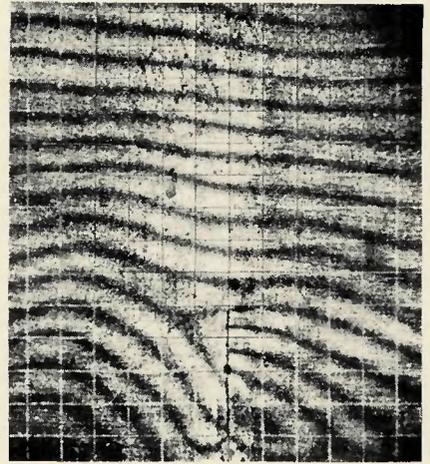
Moiré pattern for weldment of Fig. 4
